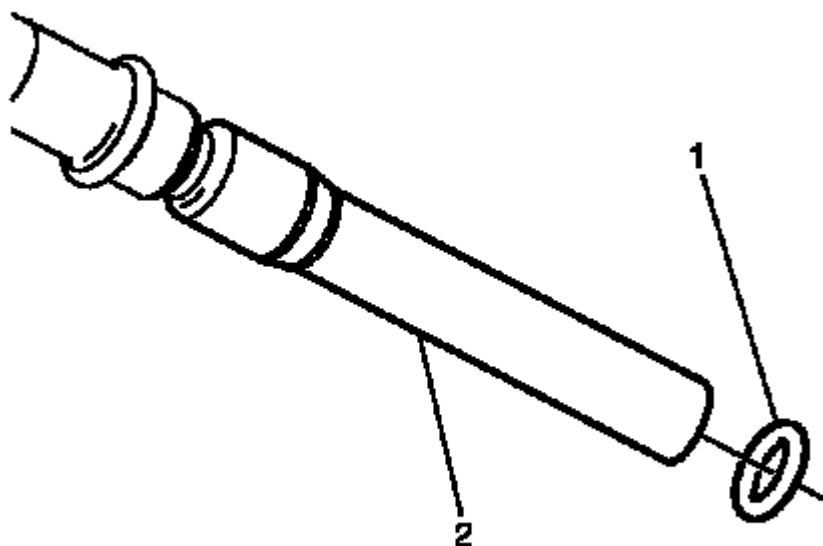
Identifying Oil Level Indicator Tube & O-Ring
